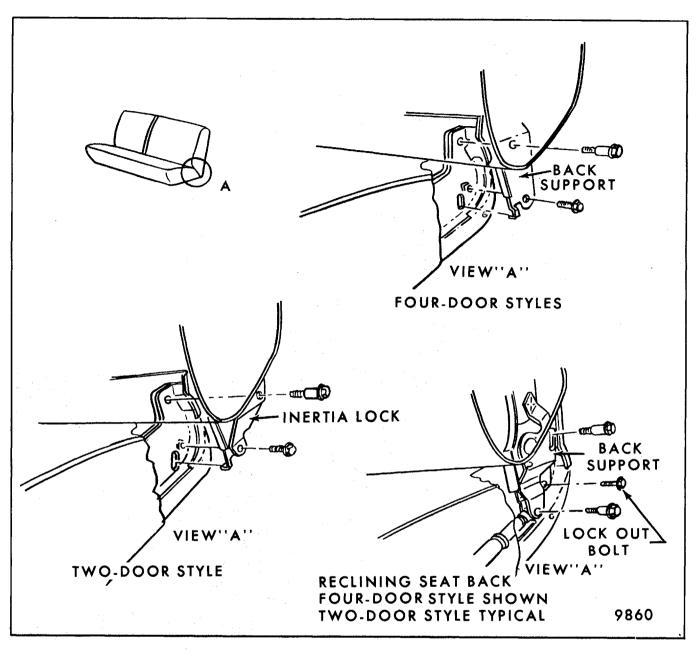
Seat Back Outer Attachment - A, B and C Styles
